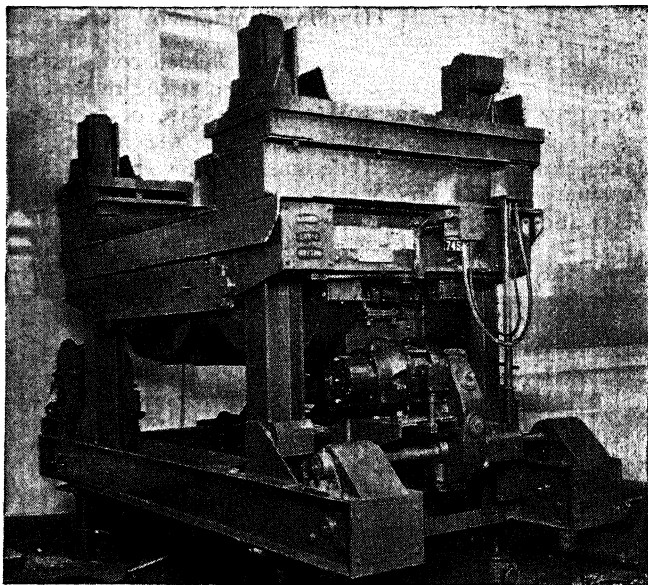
Lift table of welded steel construction for use in railroad roundhouse car shops.
